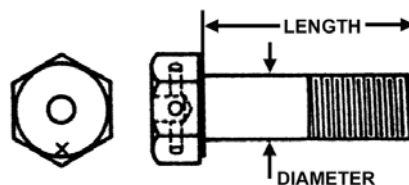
, MS20073 - MS20074 Drilled Head Bolts.
